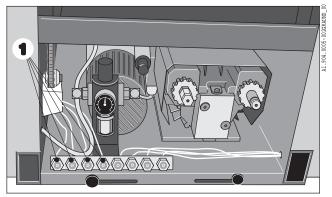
Lubricating points / feeder drive and impression cylinder gear
